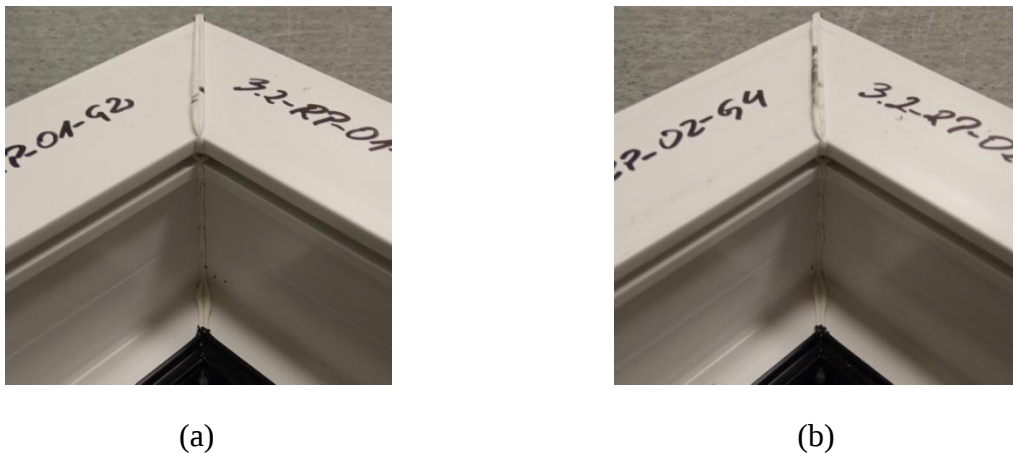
Representative welds from the reconnaissance tests: (a) welded using head 2, (b) welded using head 4 [12]
